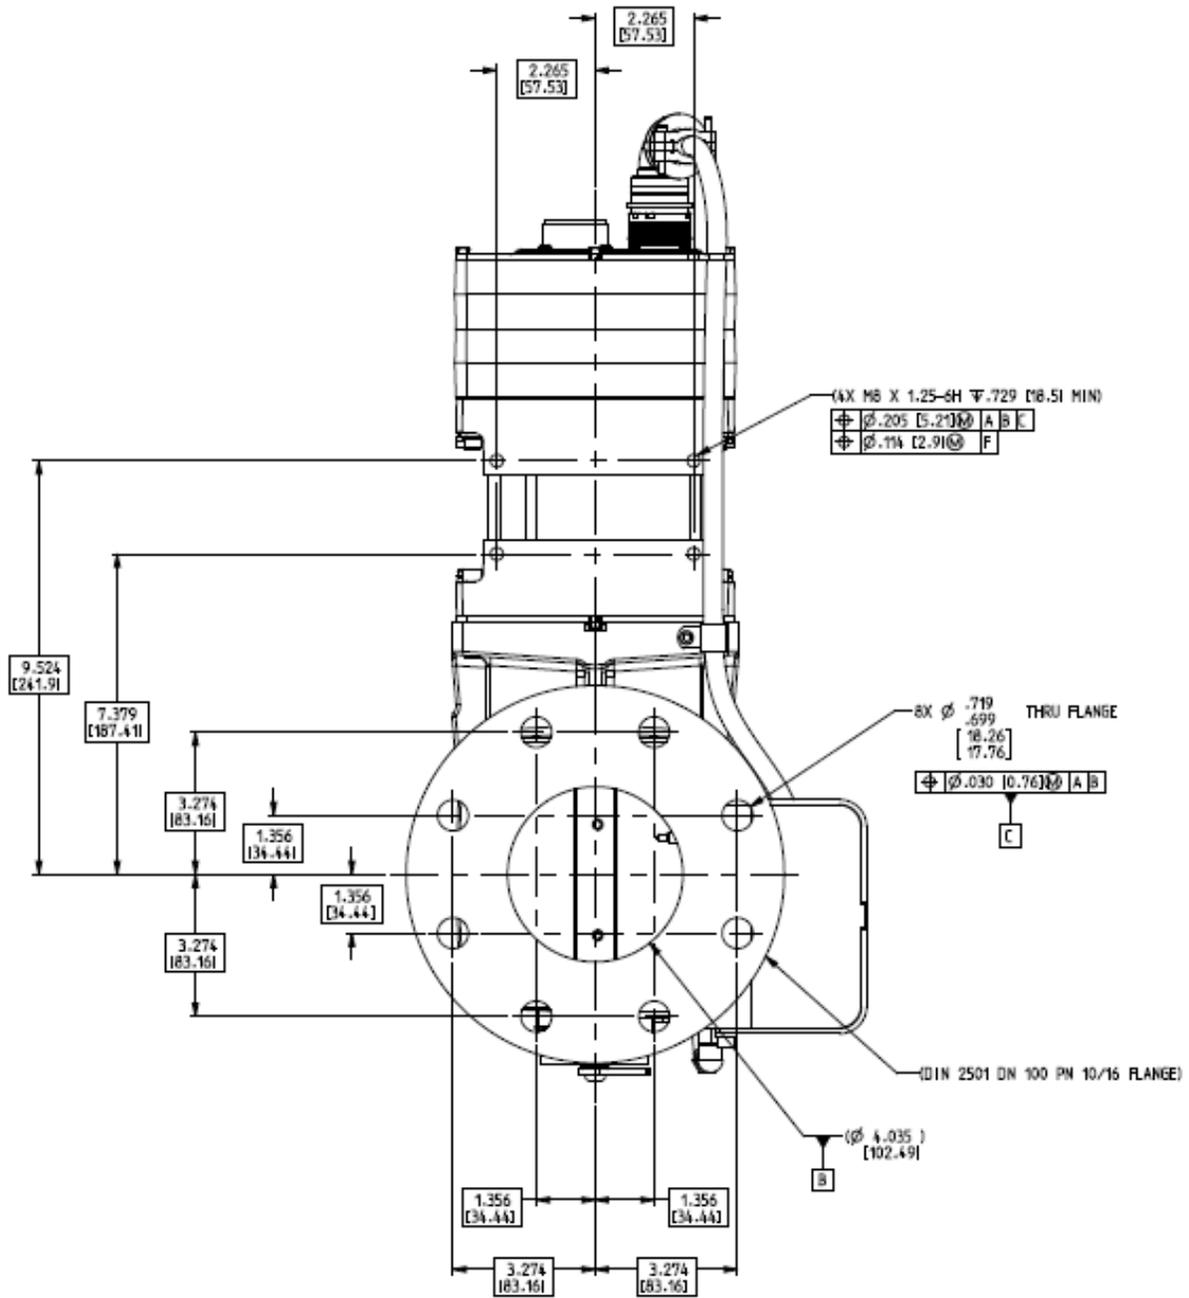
Valve Outlet Flange and Actuator Mounting View
